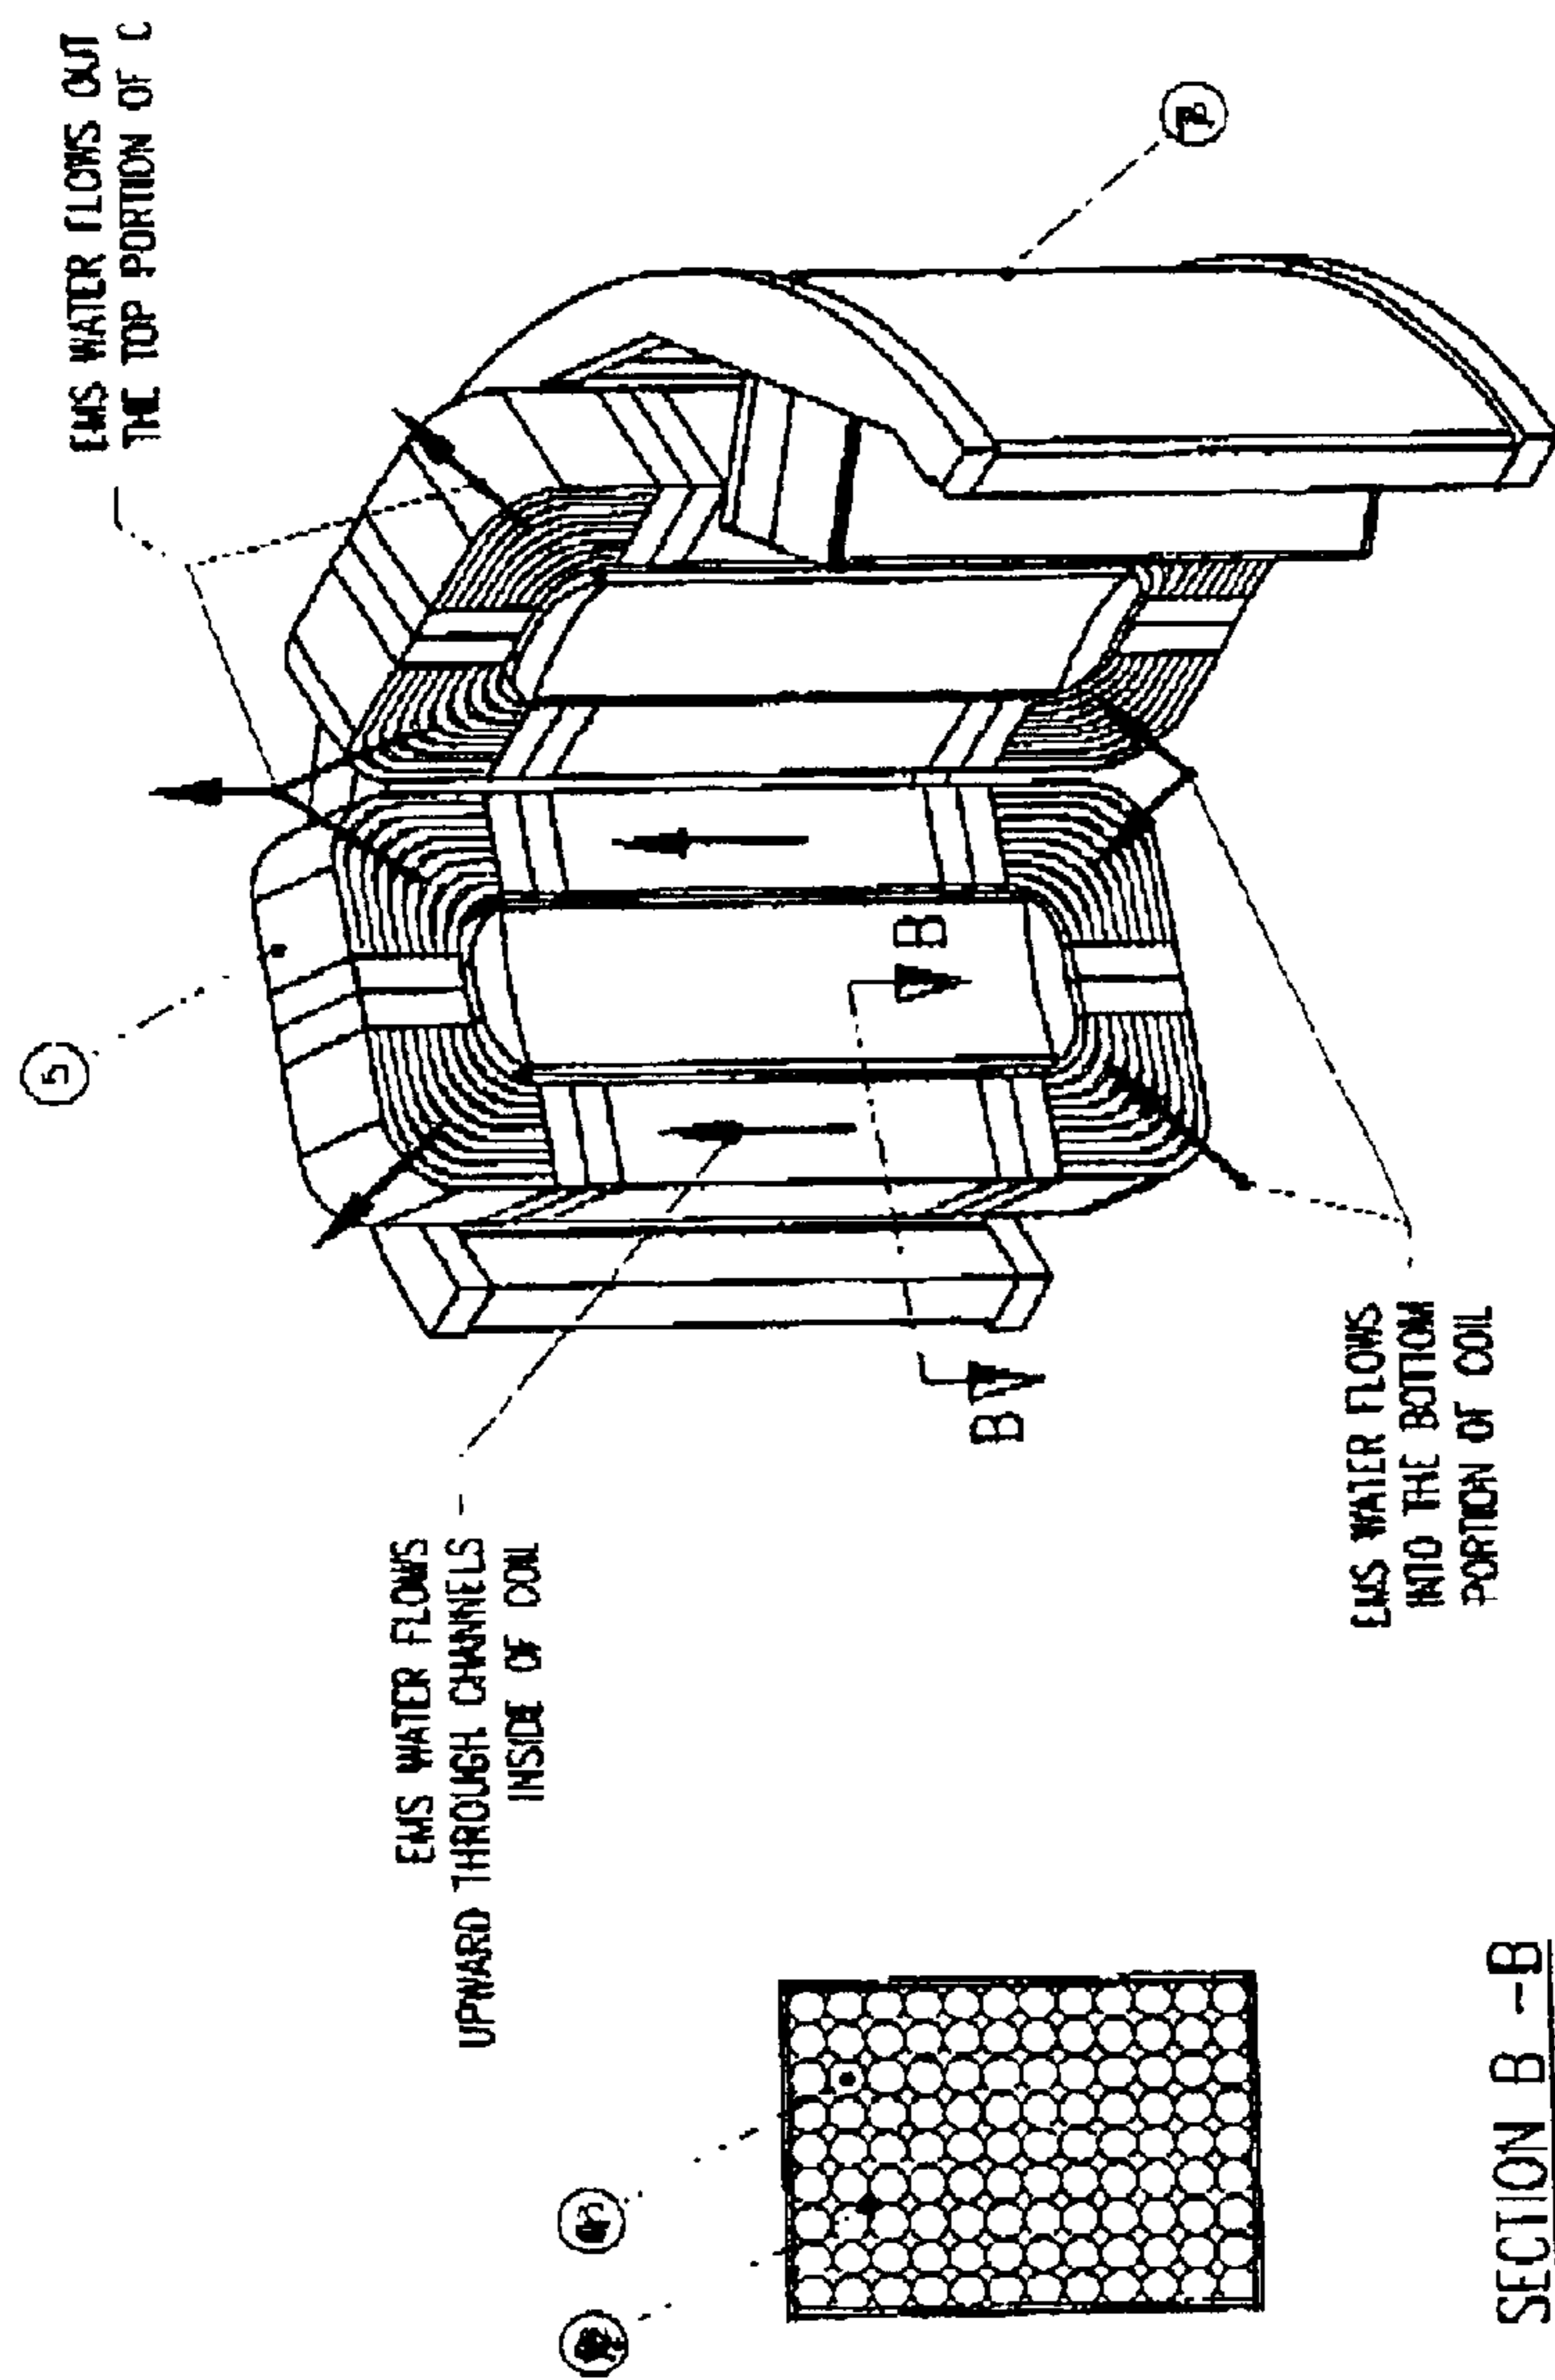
SECTIONAL VIEW OF EMS STATOR WITH WATER COOLED WINDINGS
